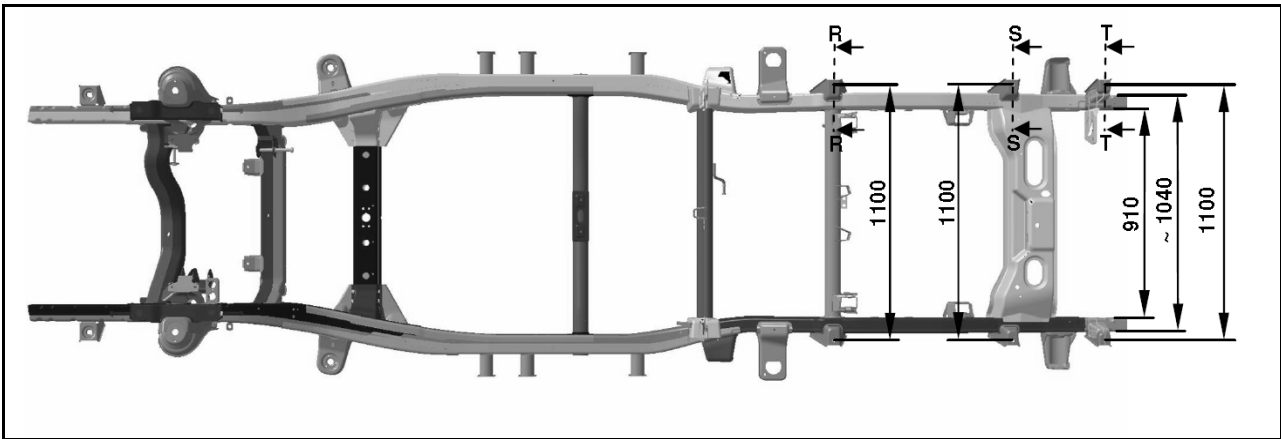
Plan view of ladder frame AMAROK DC
